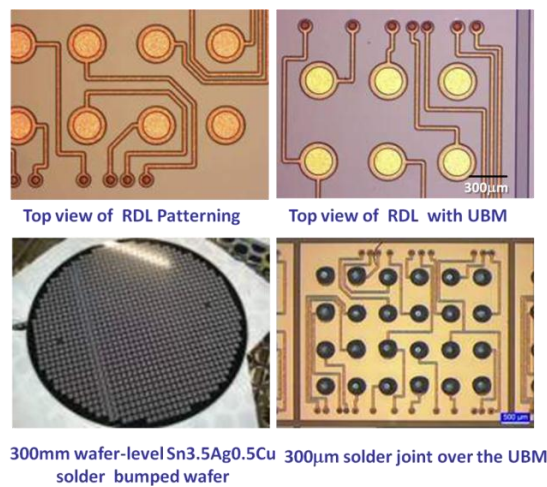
Typical steps involved during 300µm sized SnAgCu solder bumps.
